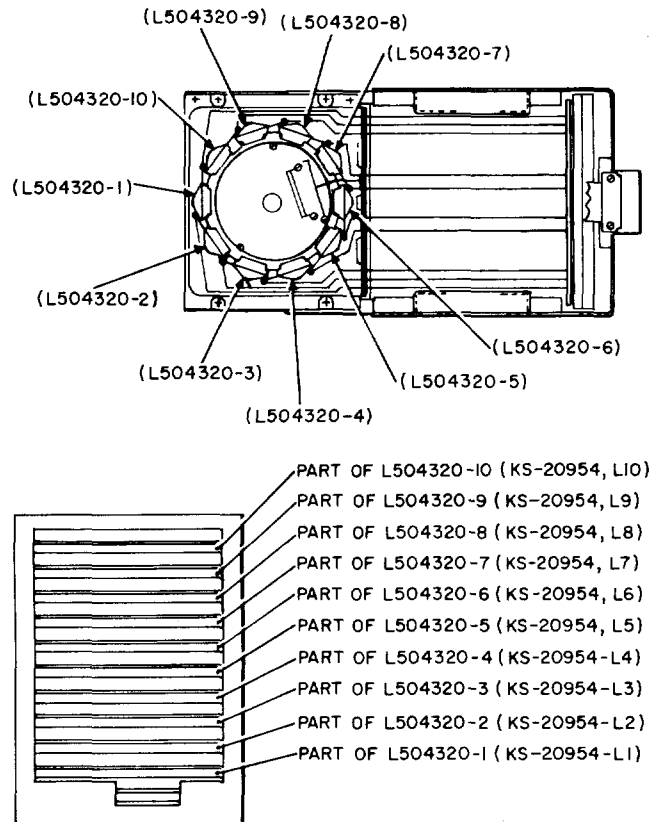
Head Bar Assembly Location (From Drum Position to Rear of Storage Unit)
